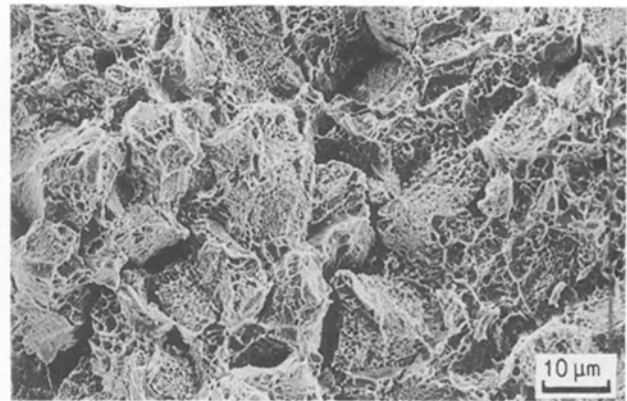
Fracture surface of the Charpy specimen, ahead of the fatigue crack front.
